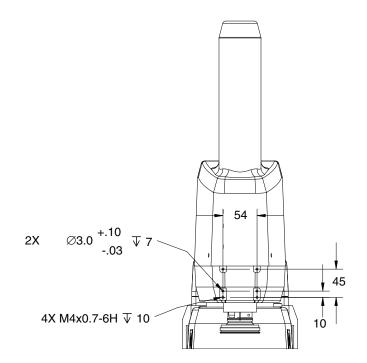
Dimensions of the Camera Bracket Mounting Pattern
